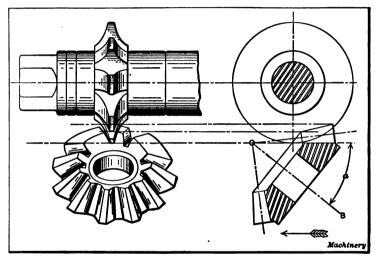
Shaping the Teeth of a Bevel Gear by the Formed Cutter Process
